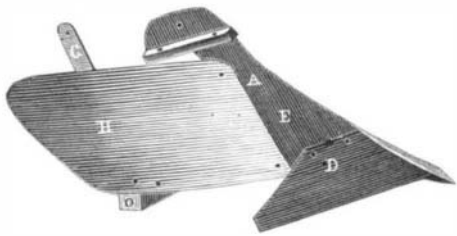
VIEW ON THE MOULD-BOARD SIDE.
